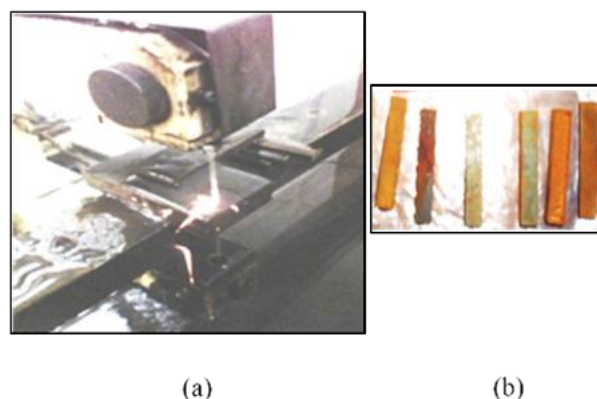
(a) Cutting of specimens from plate by wire cutting machine, (b) Specimens as prepared by the machine.
